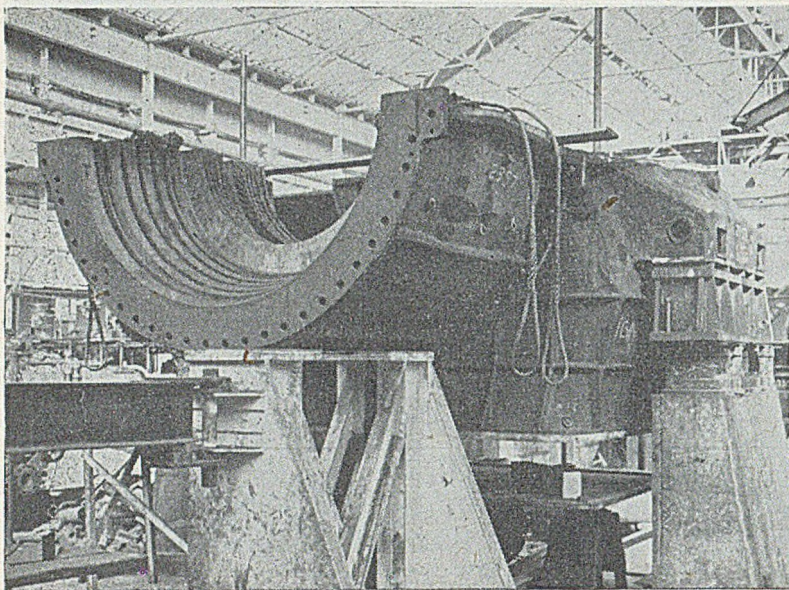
Bottom Half Low-pressure Cylinder Casting attached to Exhaust Section Casting on the Assembly Bed.
